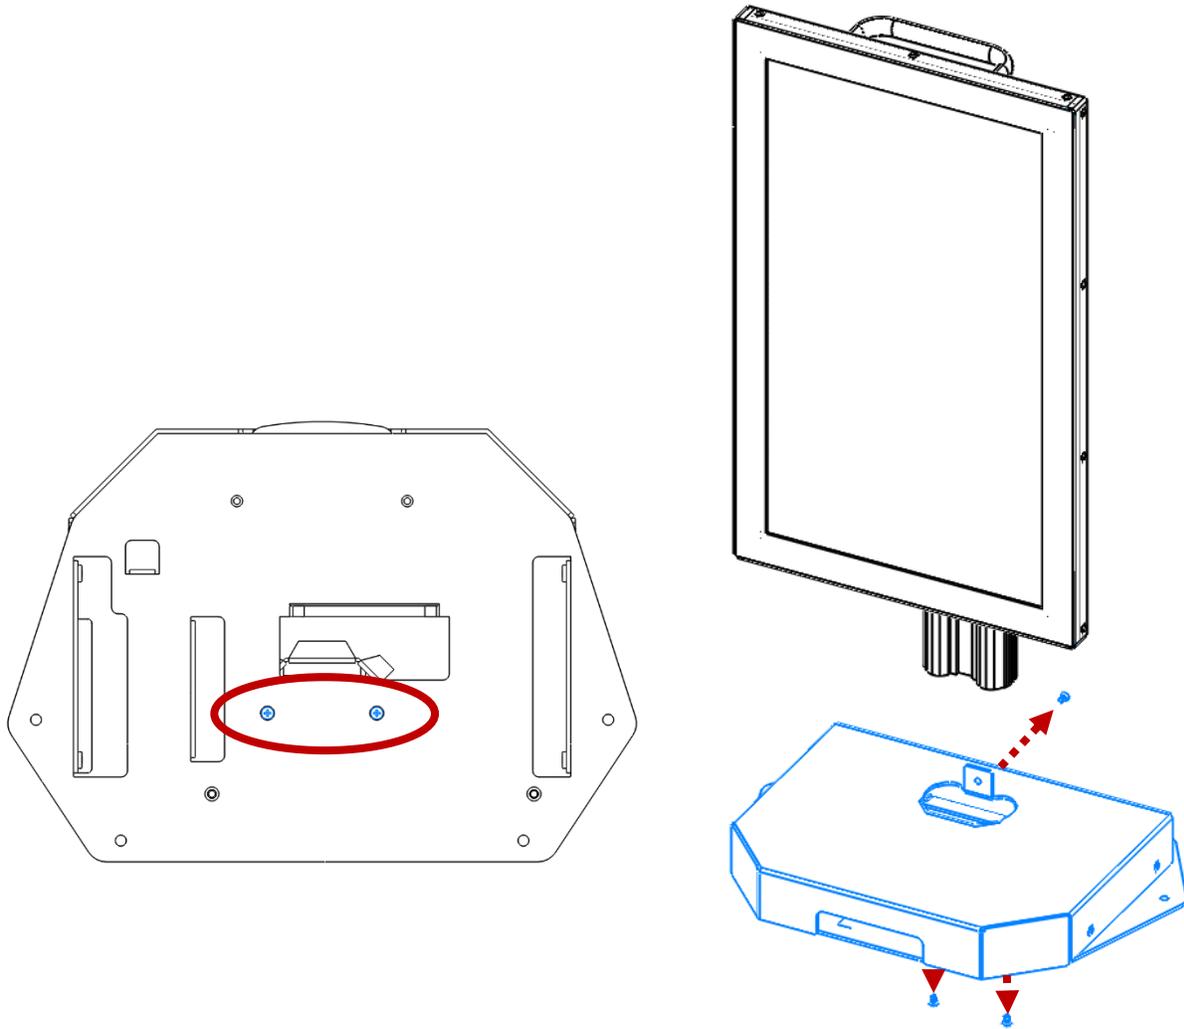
B: BOTTOM AND ISOMETRIC FRONT VIEW, REMOVING BASE FROM ARM
